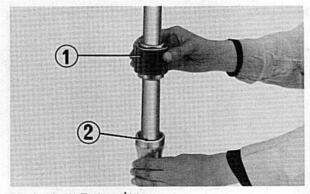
(1) Fork seal driver (2) Oil seal
